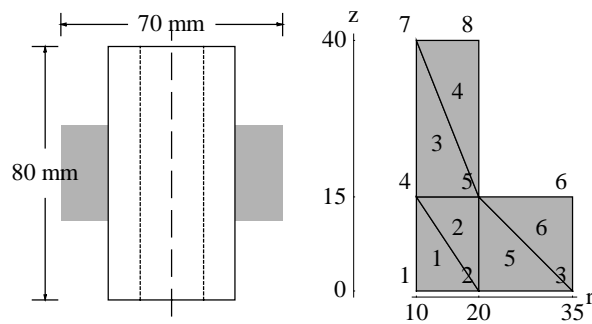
Steel and aluminum assembly and axisymmetric model of half of the assembly
